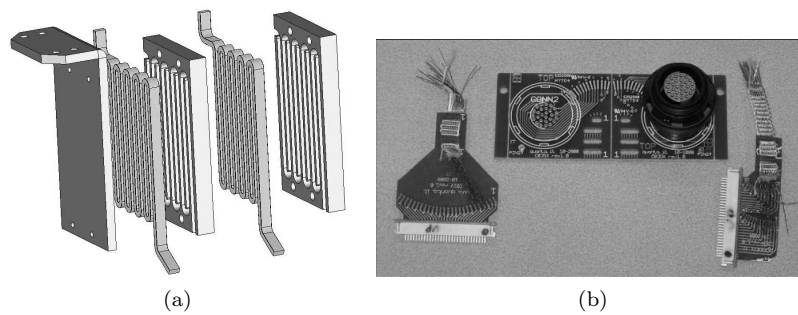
(a) Paralleling 2 SRHE (b) Photograph of ribbon electrical end connections.
